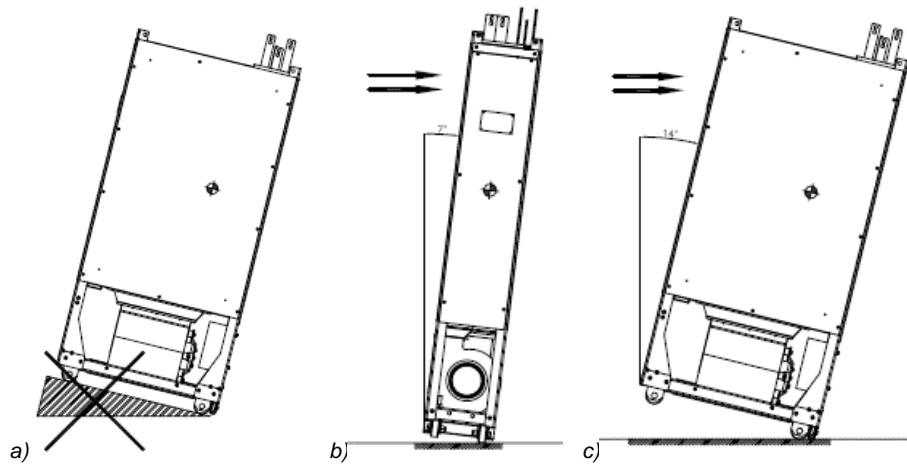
SDx.2 – Do not left the module on a sloping floor (a) and not overpass the maximum tilting (b, c)
